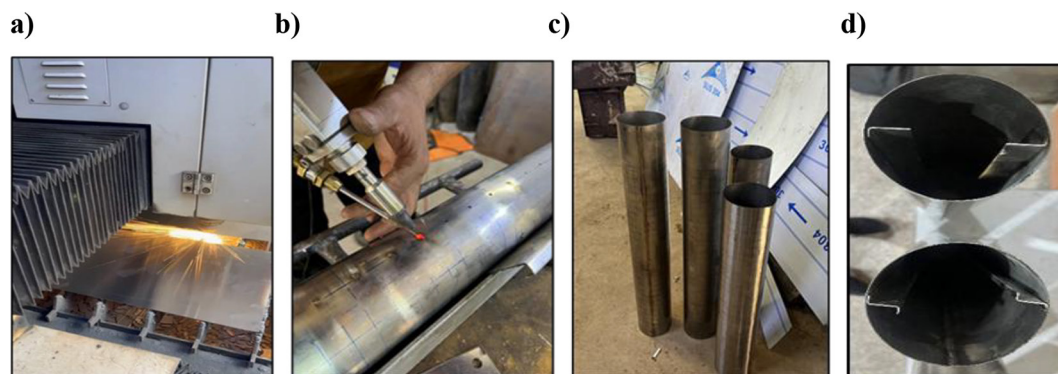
Manufacturing and welding process: (a) CNC fiber laser cutting machine; (b) fiber laser welding system; (c) specimen; (d) stiffened specimen
